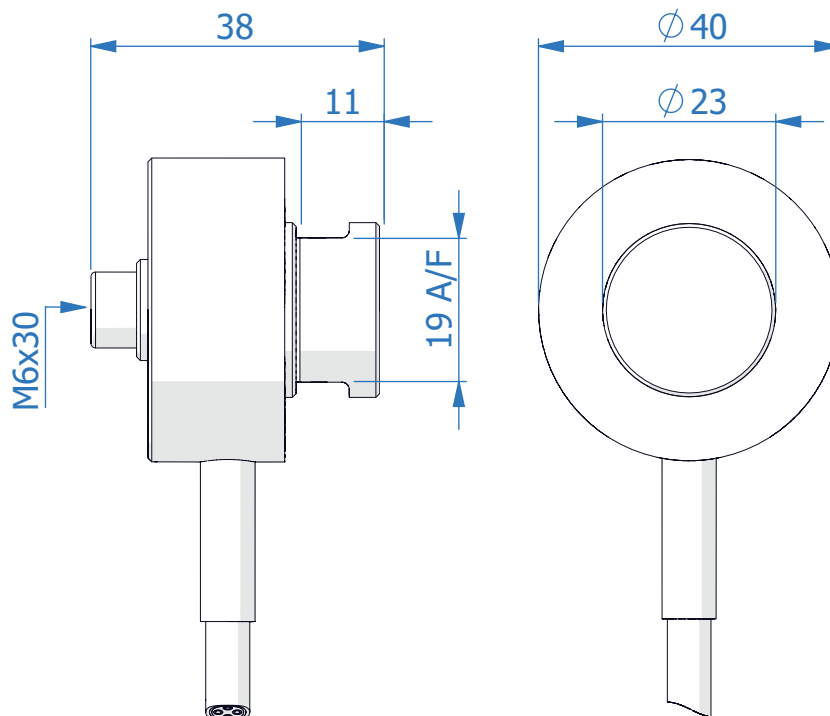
Chemically Bonded Adapter Dimensions (mm)
